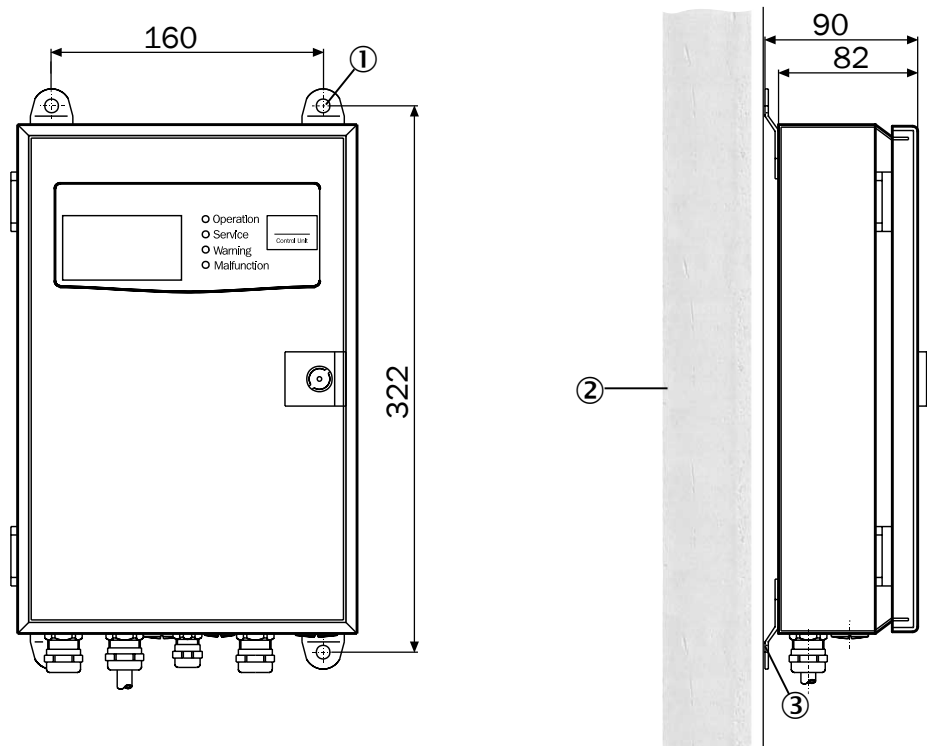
Fitting the control unit AWE, sheet steel enclosure (dimensions in mm)
